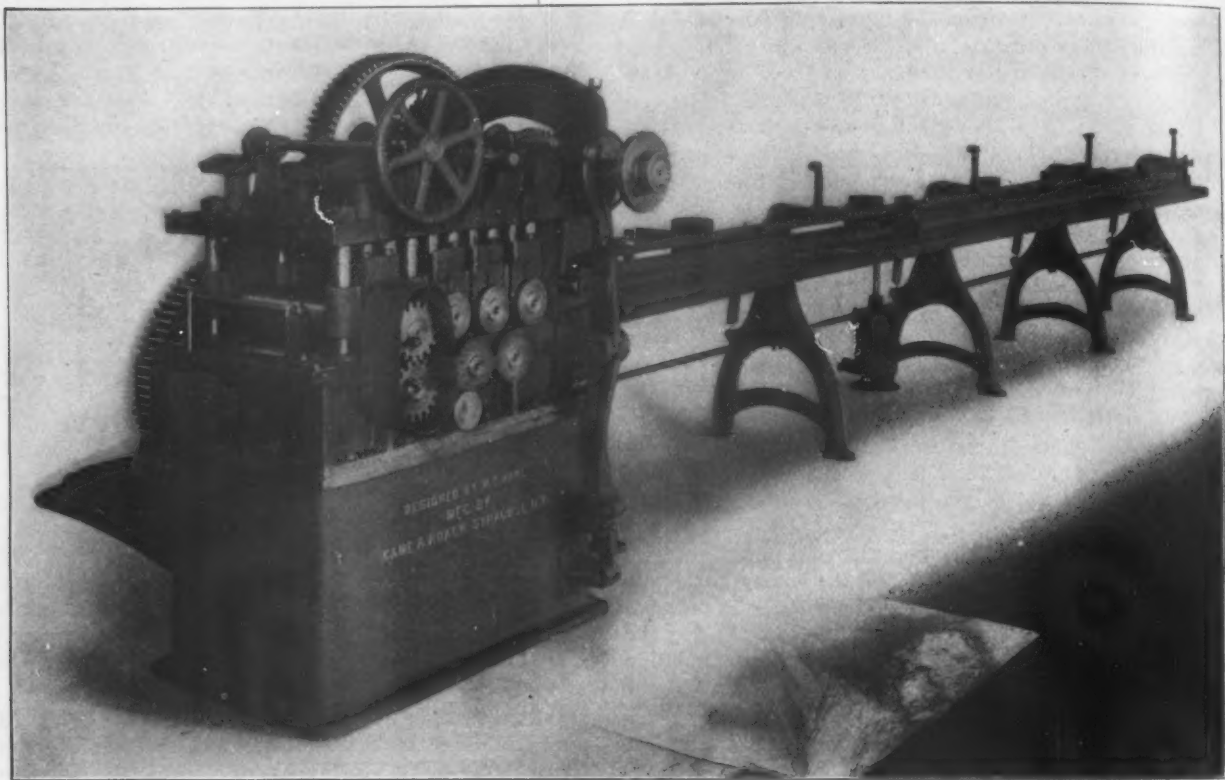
The No. 2 Sheet Straightener and Automatic Shears Built by Kane & Roach, Syracuse, N. Y.
